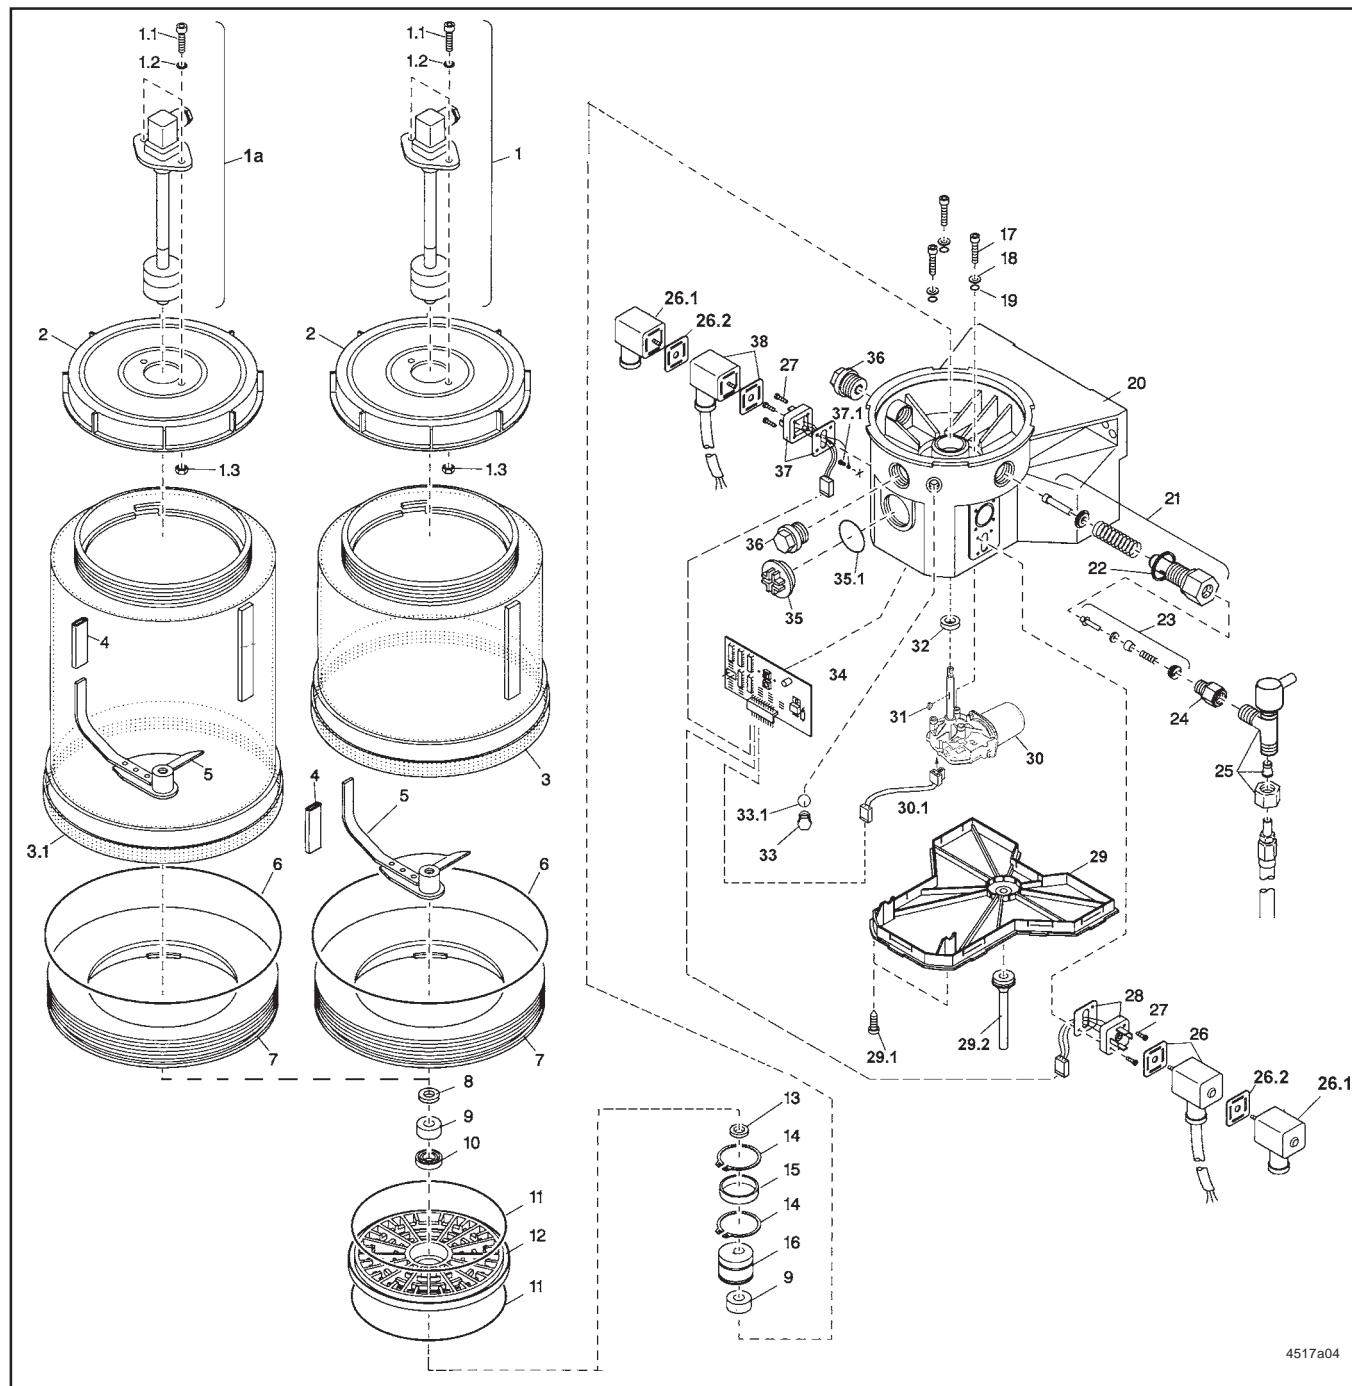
Explosion view for P 203 -4YLBO/8YLBO-K.-12/24-1/2A1.01/10
